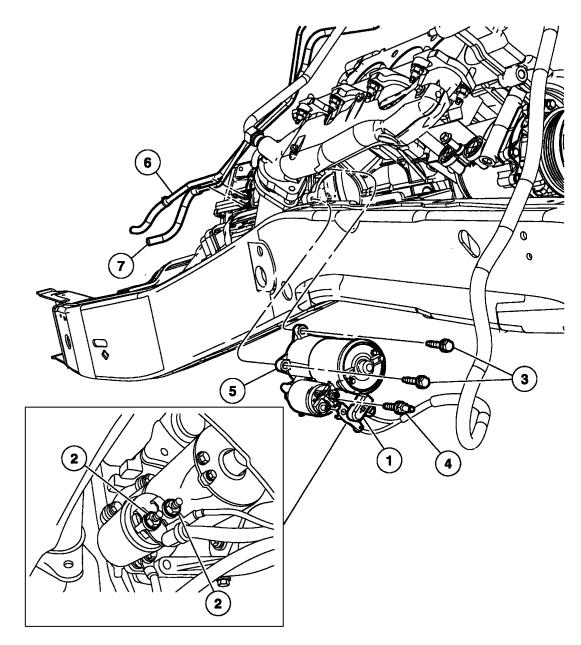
Removing/Installing Cable Bracket Courtesy of FORD MOTOR CO.
